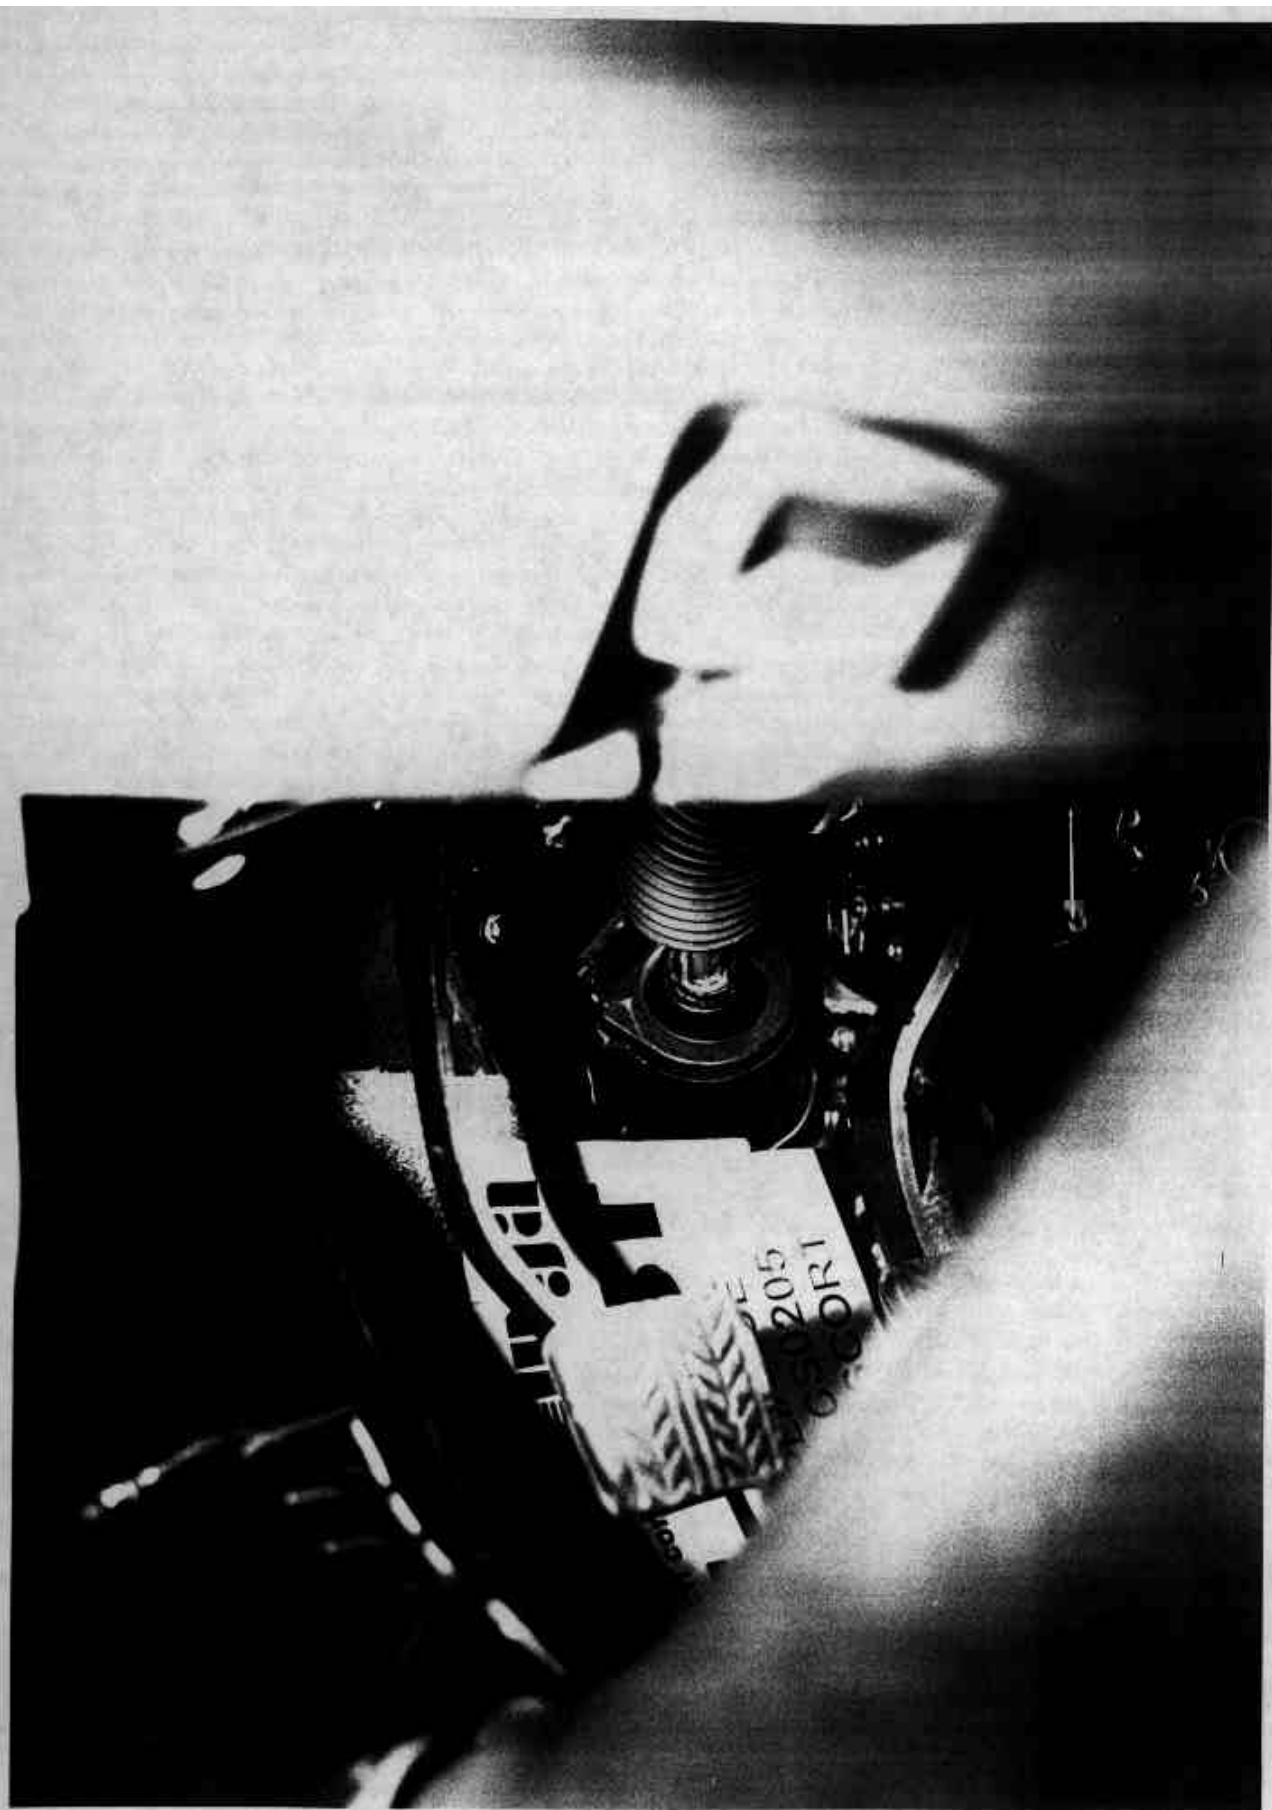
Pre-Test Steering Column at Firewall View (Interior)
